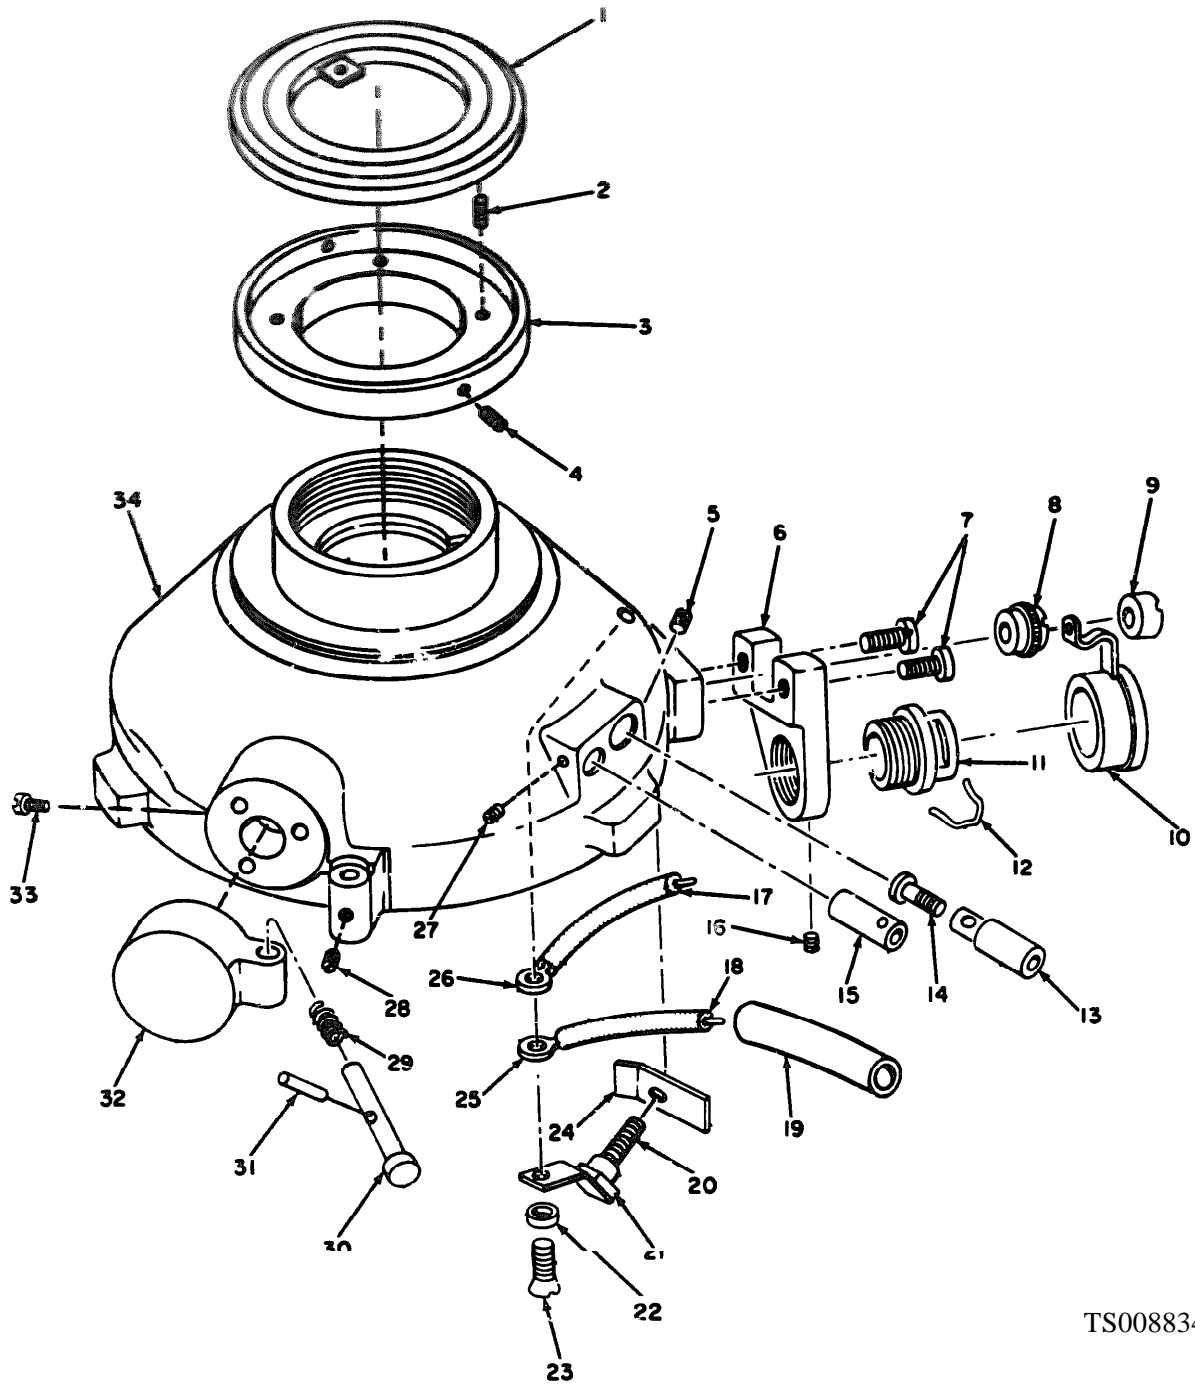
Optical Plummet Eyepiece and Objective, and Mounting Flange
